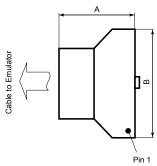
The dimensions of the ADA-JET-ARM20 probe. Top view. A = 19.3 mm (0.76 in.)[low-voltage: A = 24.3 mm (0.96 in.)] B = 30.5mm (1.2 in.)
